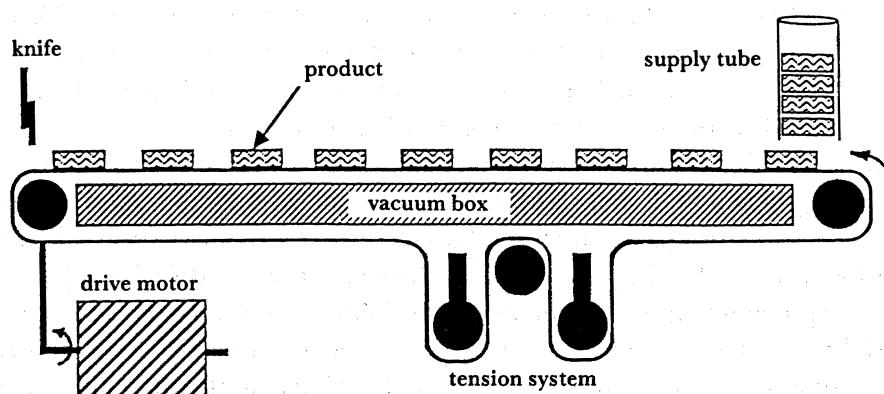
Simplified layout of the machine showing conveyor belt, products, original tension system, knife, vacuum box, supply tube and drive motor.
